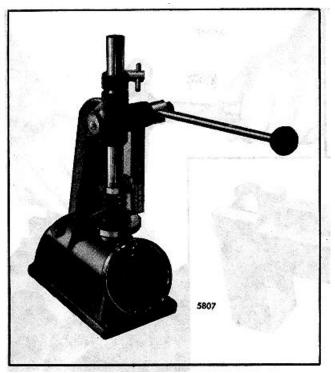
Testing Cam Follower Spring using Tool J 22738-02
